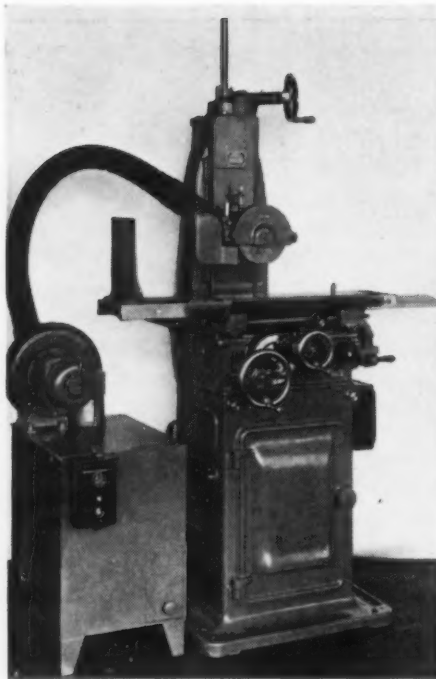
MOTOR-DRIVEN DUST-EXHAUST ATTACHMENT
